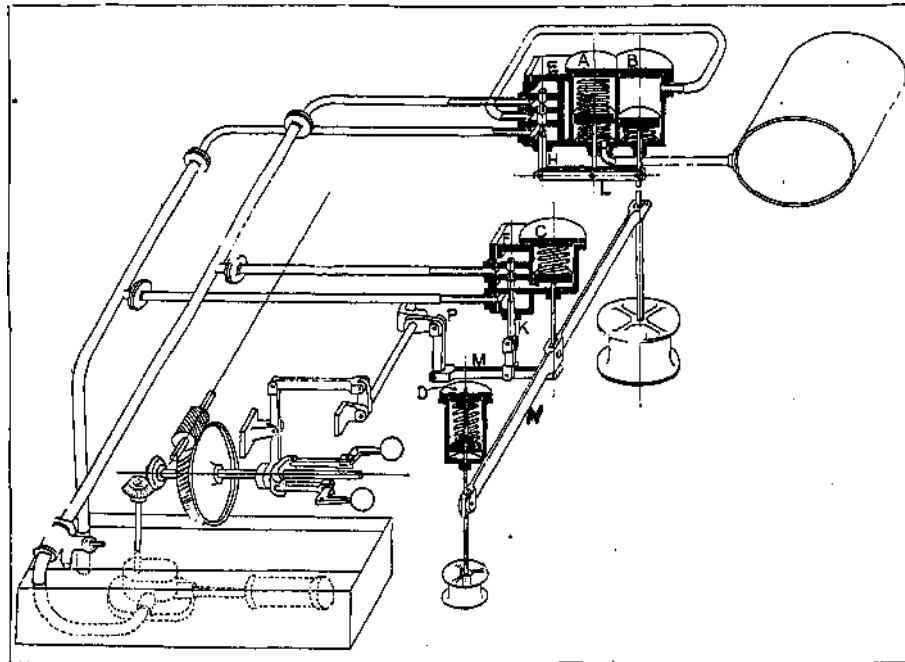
Isometric View of Valve Gear of Metropolitan-Vickers Mixed-pressure Turbine
